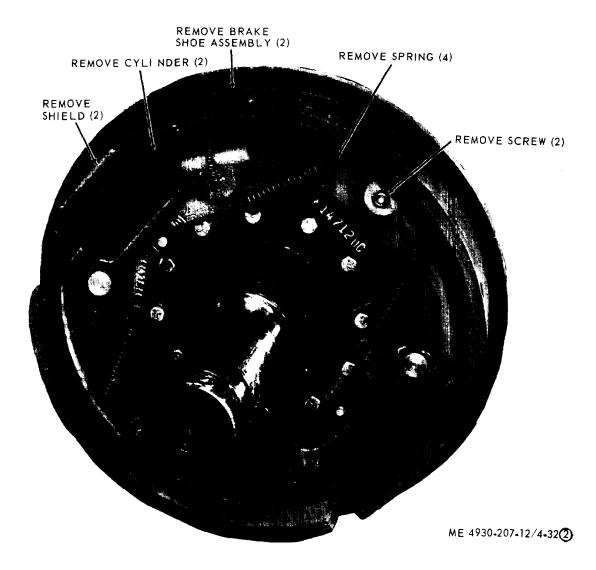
Wheel cylinder and brake shoe, removal and installation (sheet 2 of 2)
